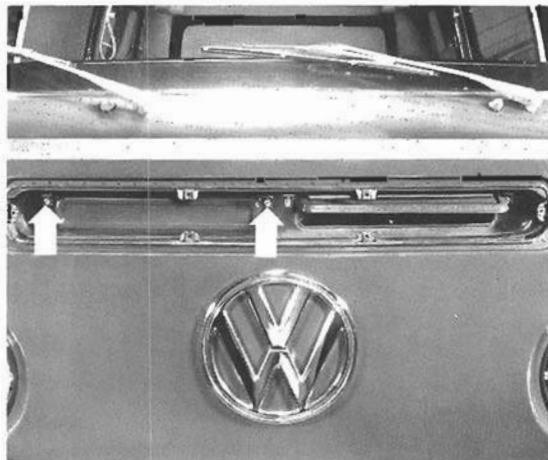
Screws (arrows) that hold fresh air flap to vehicle body.
